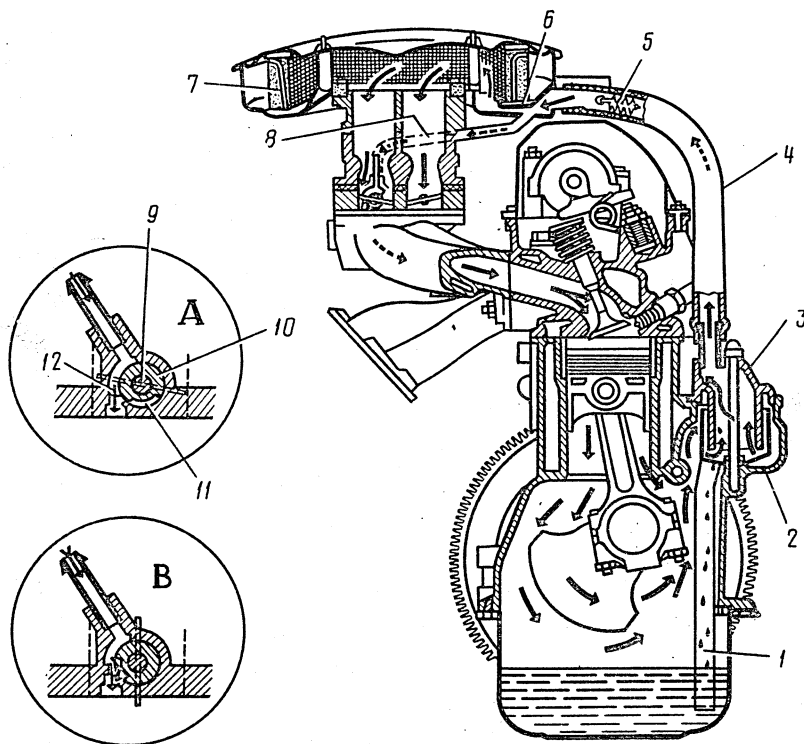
Crankcase Breathing System: A and B - operation of carburettor fume valve unit at low (A) and high (B) crankshaft speeds; 1 - oil separator drain pipe; 2 - oil separator; 3 - breather cover; 4 - gas drawout hose; 5 - flame arrester; 6 - drawout manifold; 7 - air cleaner element; 8 - hose discharging gases into carburettor after-throttle space; 9 - primary throttle valve shaft; 10 - fume valve; 11 - fume valve groove; 12 - calibrated orifice
